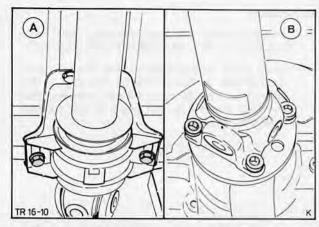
Driveshaft mountings - rear axle flange and centre bearing
